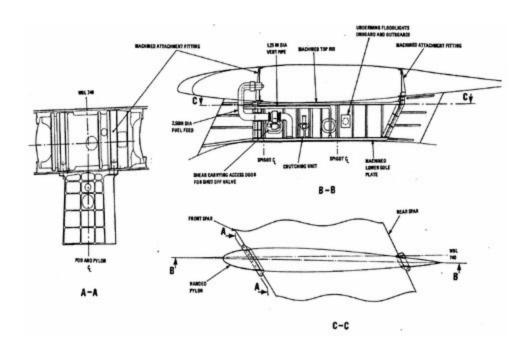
Lockheed Tristar three-point tanker wing pylon
